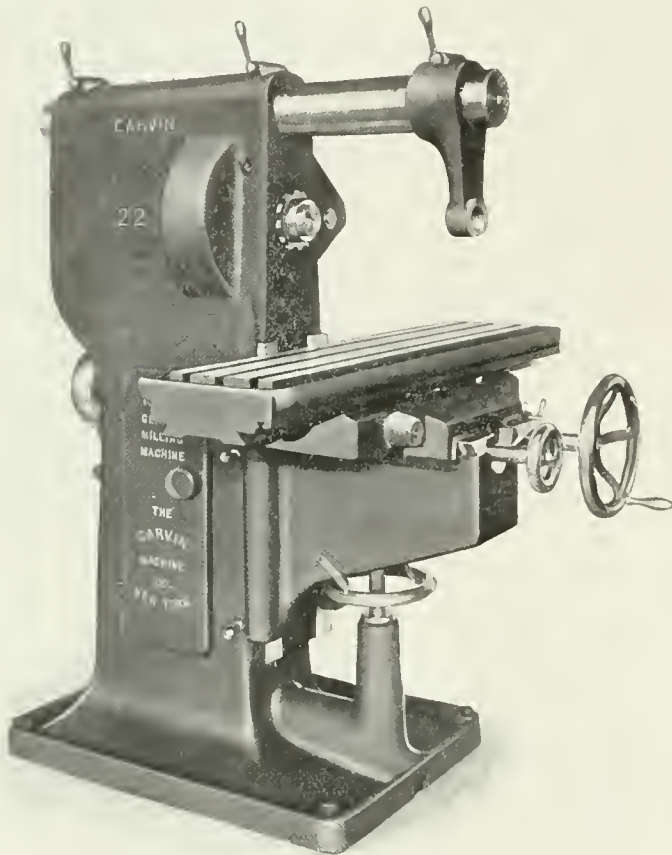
No. 22 Plain Milling Machine, built by Garvin Machine Co.
